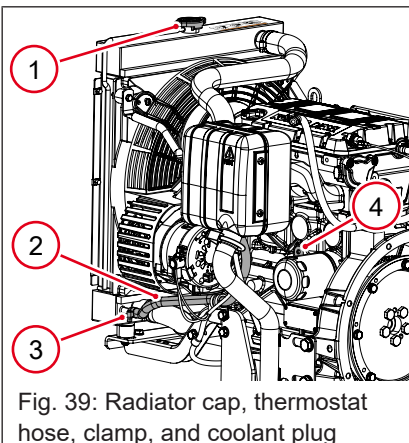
Radiator cap, thermostat hose, clamp, and coolant plug
